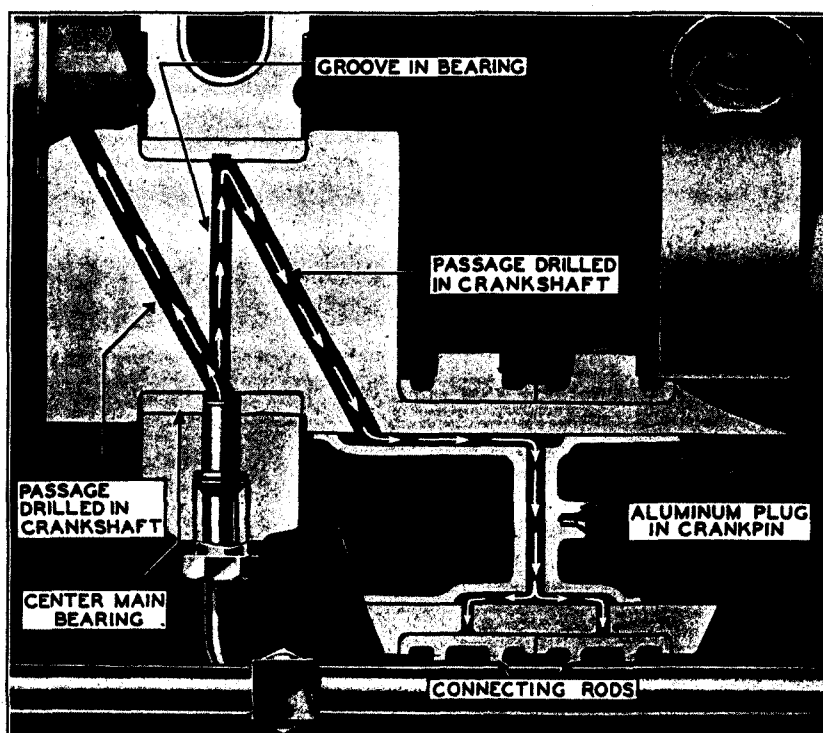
Section of Crankshaft Showing Oil Passages to Connecting Rod Bearings
